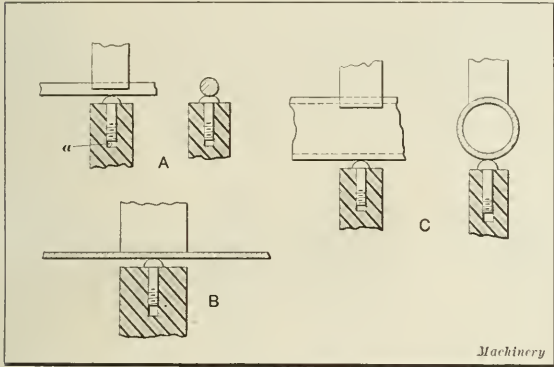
Diagram illustrating Processes of welding Screws to Sheet Tubing, etc.
